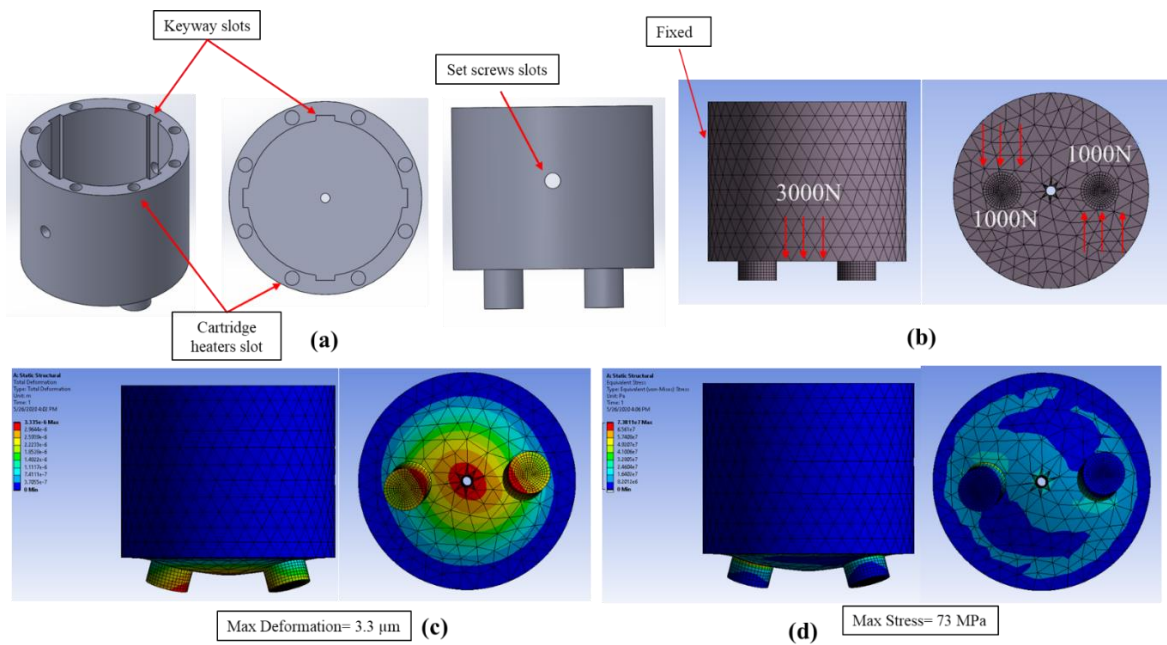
Workpiece holder design: CAD model of workpiece holder on different planes (a). The force applied on different faces of the workpiece holder is shown in (b). Deformation and Maximum stress results of the holder is shown in (c) and (d) respectively
